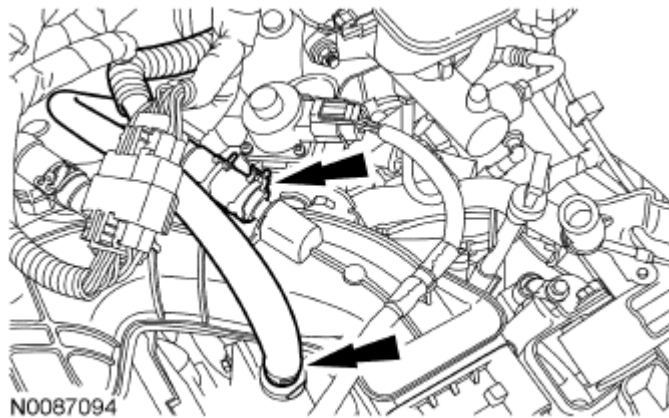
Locating Evaporative Emission Canister Purge Valve Tube
